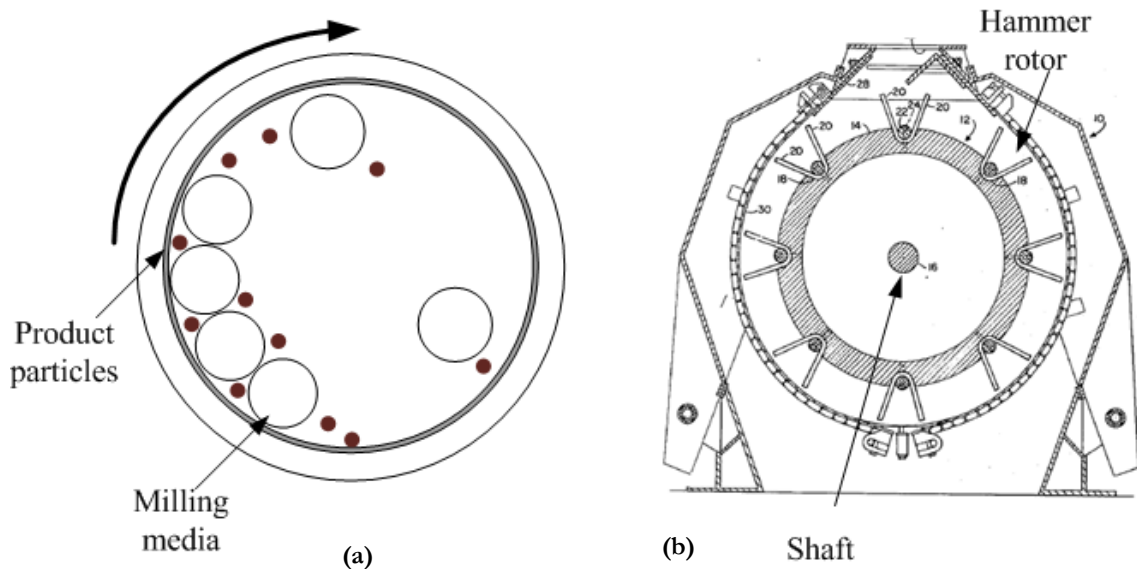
a) Ball mill cross section sketch. b) Hammer mill cross sectional view (Vargo 1982).
